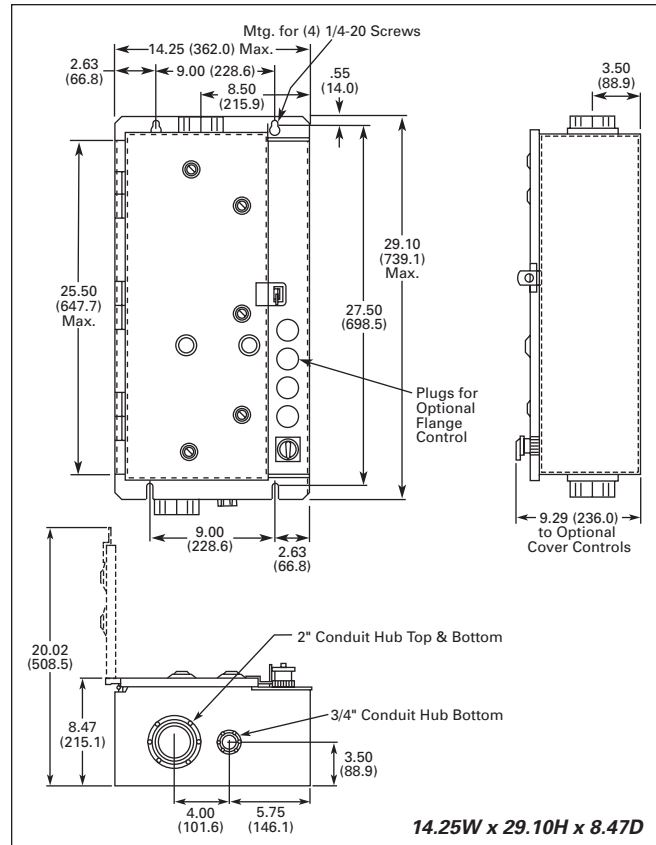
Box 8, Type 4X — Approximate Dimensions in Inches (mm)
